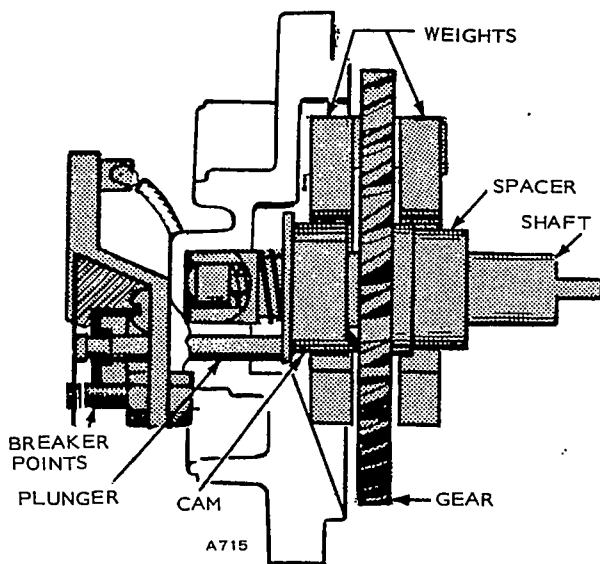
CENTRIFUGAL SWITCH ASSEMBLY
